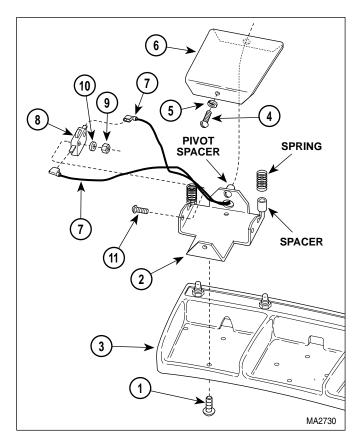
Typical Foot Pedal Foot Switch Removal / Installation
